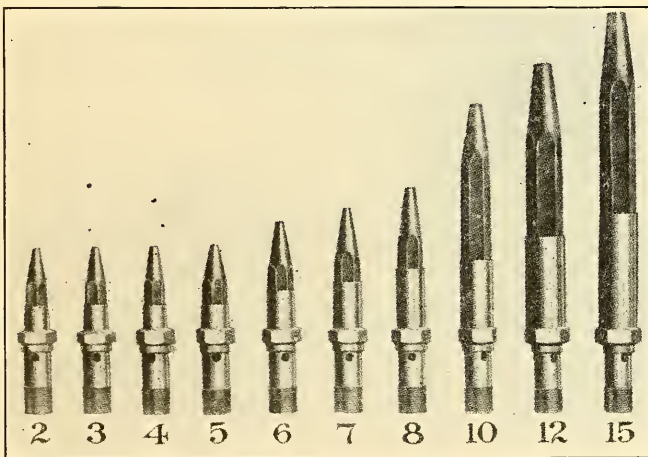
A Set of Oxweld Welding Tips.
